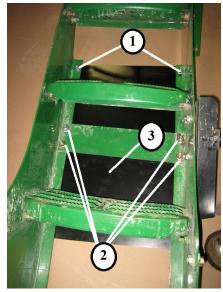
Step Cover Plate Installation Key 1 –M10x30 Flange Bolt (reuse) Key 2 – Install using existing hardware Key 3 – Step Cover Plate (reference)
